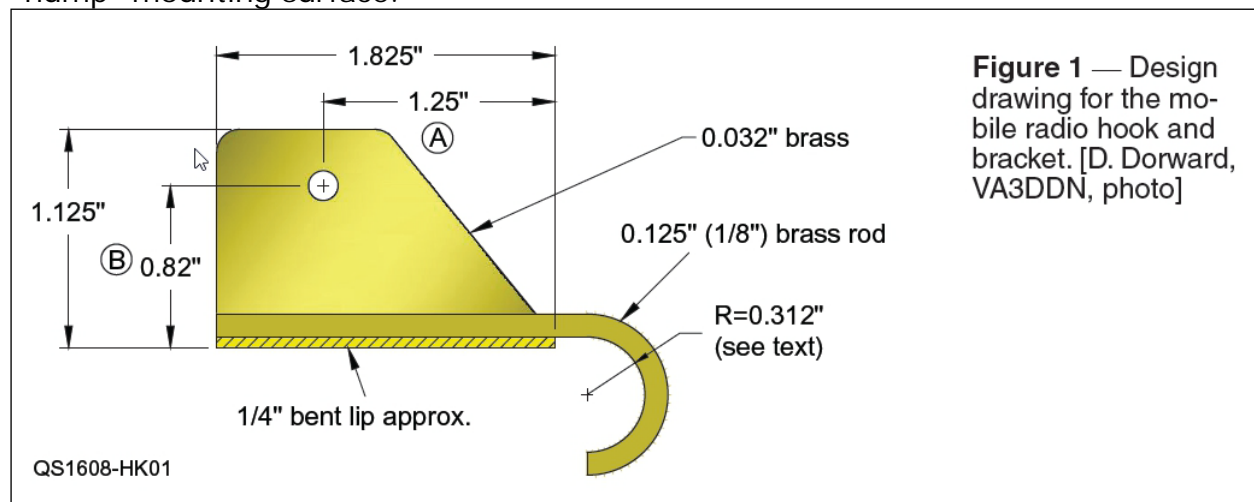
shows the dimensions of the hook/brackets that I ended up with. These were made up from 1/8" brass rod bent in vise around a piece of 5/8" wooden dowel. These hooks I then soldered along the bend crease in the brass plate as shown. Note that this small bent "lip" across the width of the plate, helps to stiffen the plate, and also makes it easier to position and solder the hook to it.
